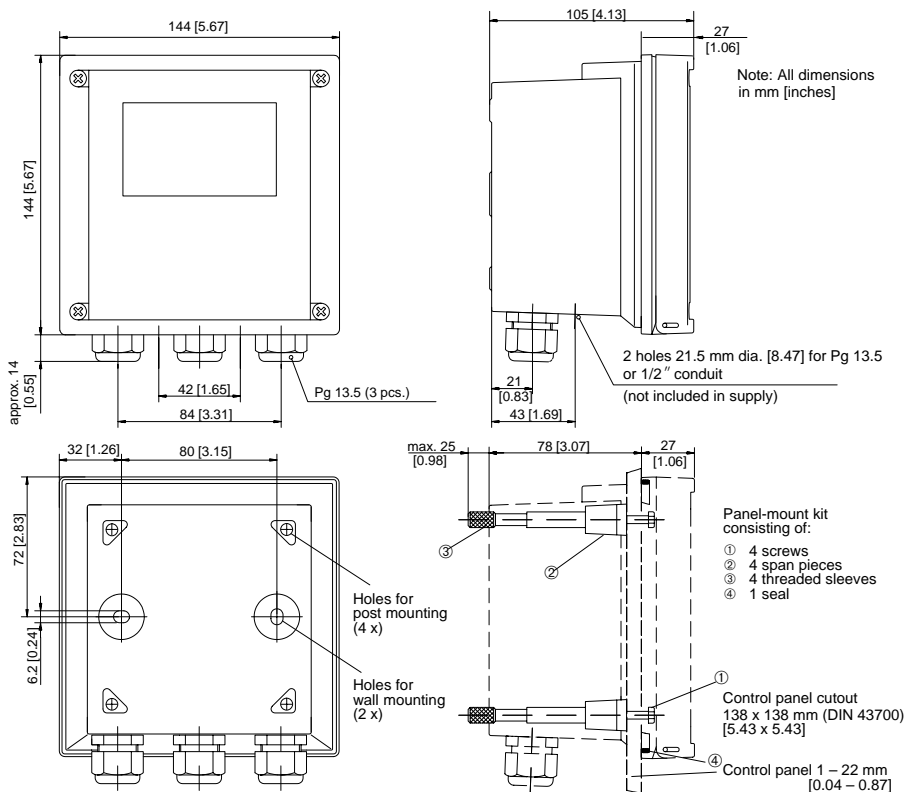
Dimension drawing for Transmitter, mounting diagram and P/N 51205990-001 panel-mount kit
